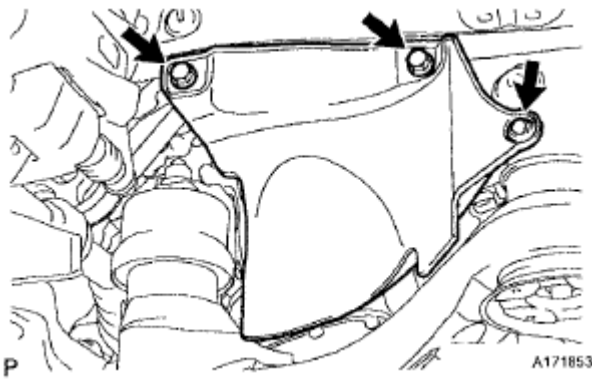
Locating Front Fender Apron Seal RH Bolts And Clip
